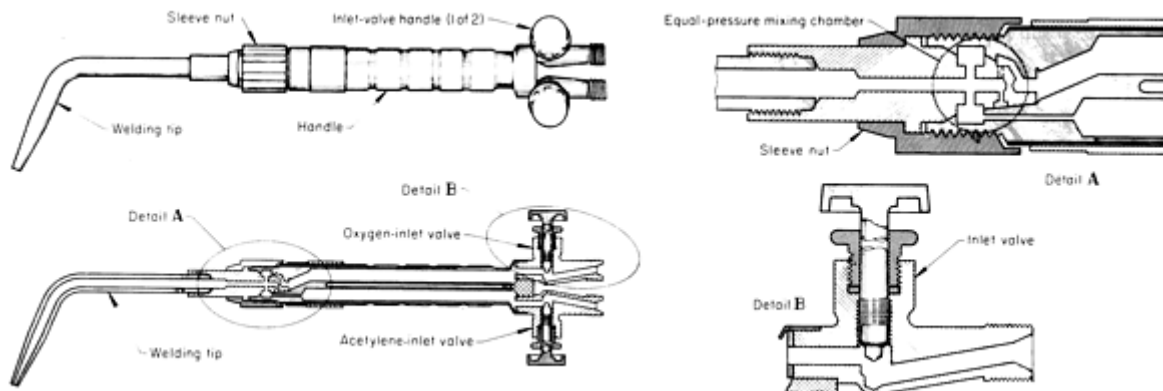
SCHEMATIC SHOWING CROSS-SECTIONAL VIEWS OF GAS PASSAGES IN A TYPICAL OXYFUEL GAS WELDING TORCH
